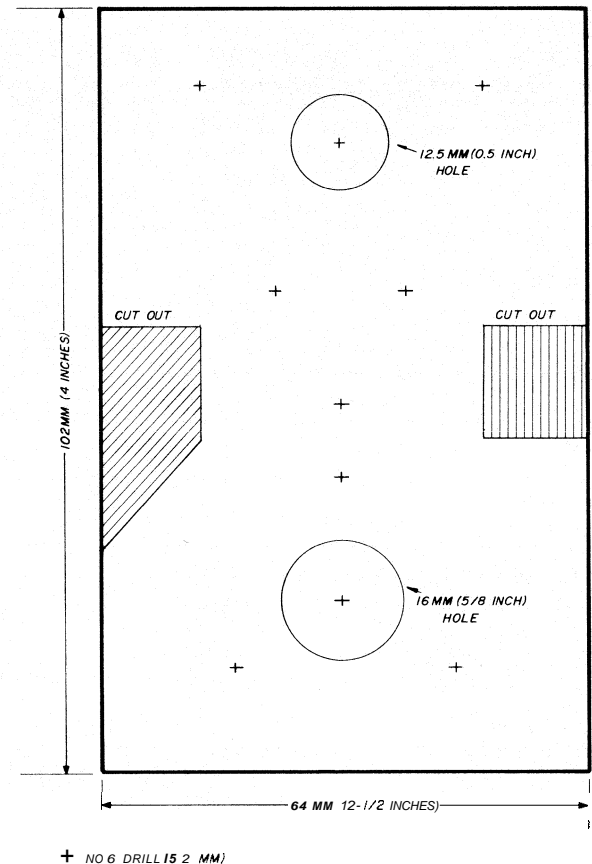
Switch-plate drilling template. Punch or drill through the drawing into the blank switch plate.
